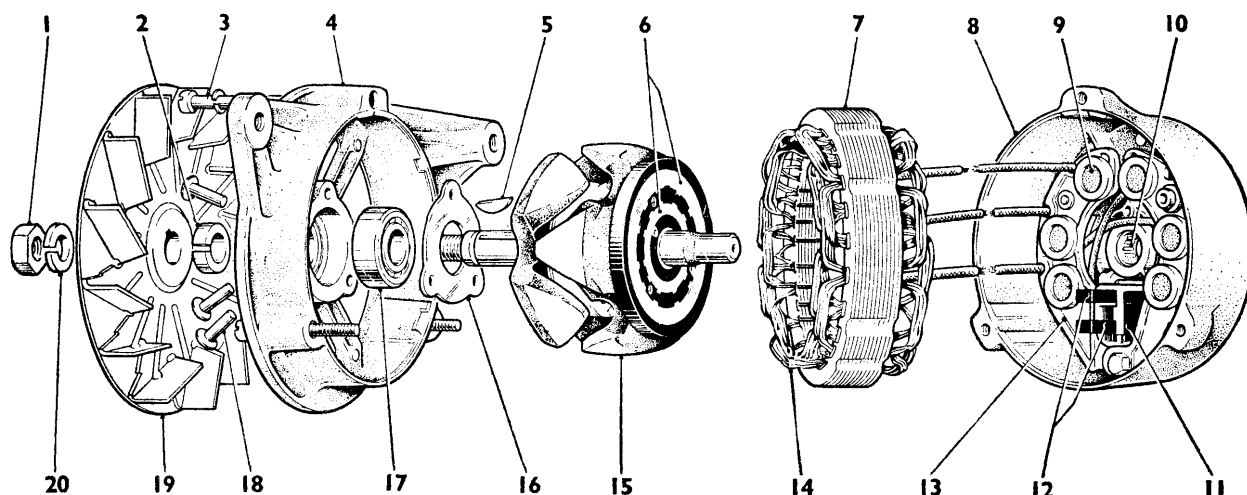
EXPLODED VIEW OF 11 AC ALTERNATOR
